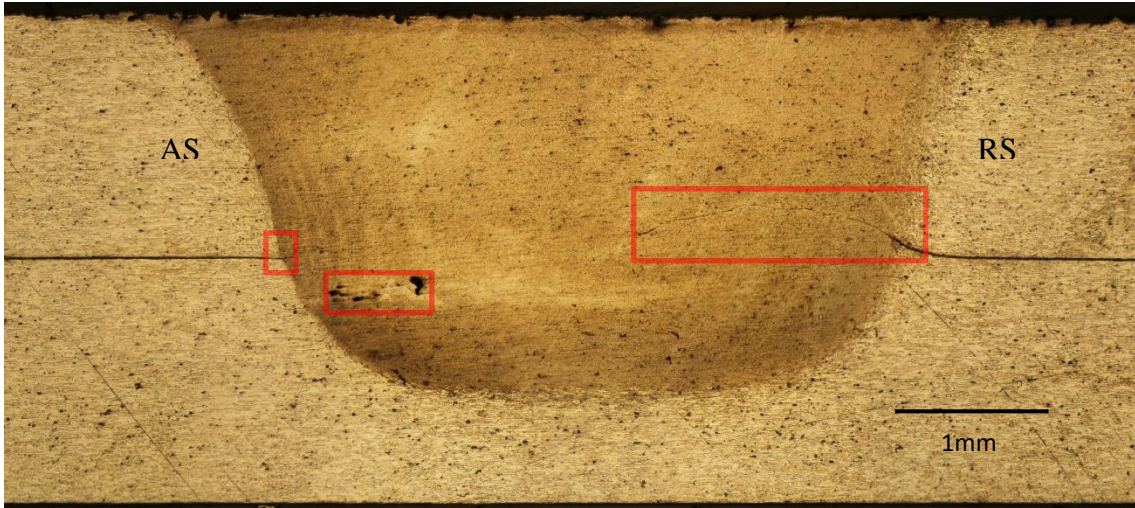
Metallographic picture of SSFSW #3758A welding sheet cross section at -1000 rpm, 4.23 mm/sec, 9.79 kN tool 1(RH)
